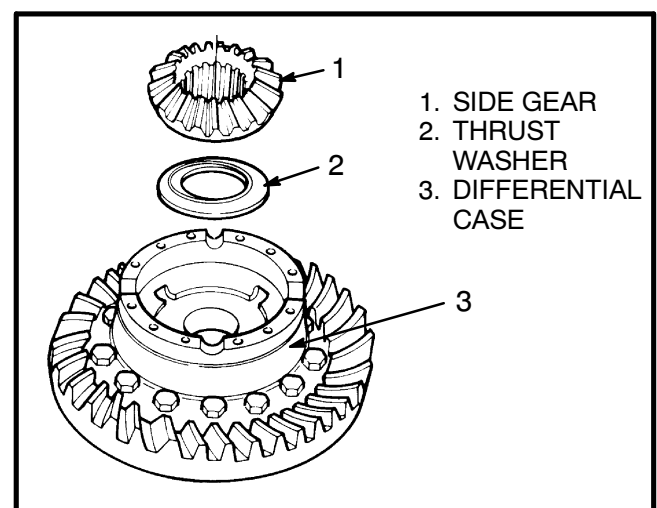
INSTALL A THRUST WASHER AND SIDE GEAR
